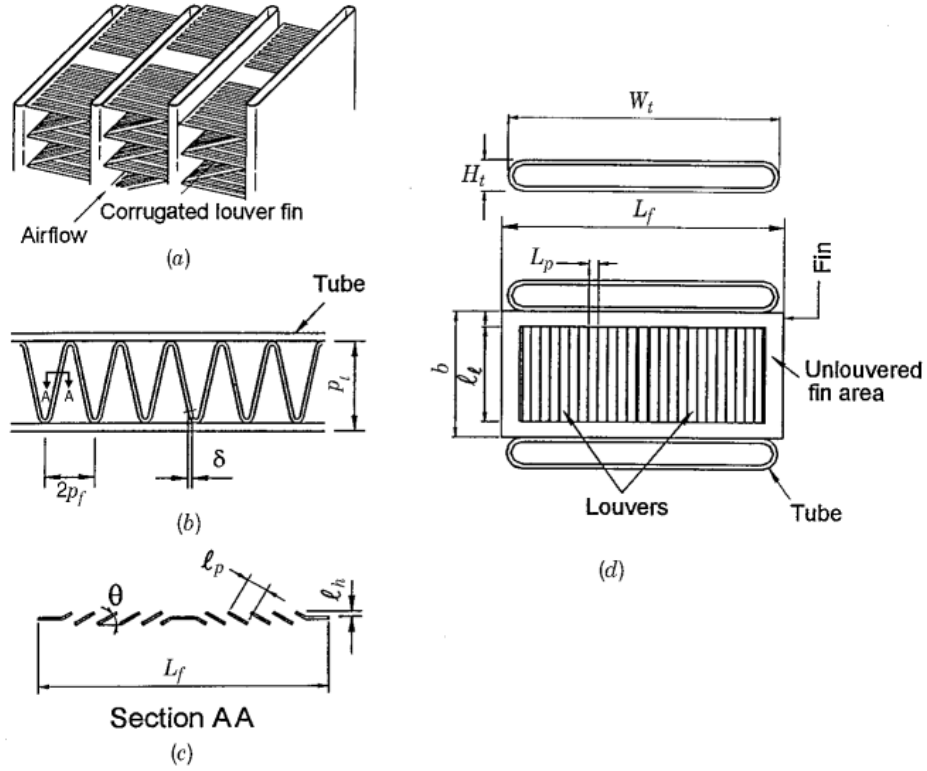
Sketch of the Geometry of a Louvred Plate-fin Heat Exchanger. Isometric View Sketch (a), Fin Frontal View Sketch (b), Fin Cross-section Sketch (c) and Fin Side View Sketch (d)
